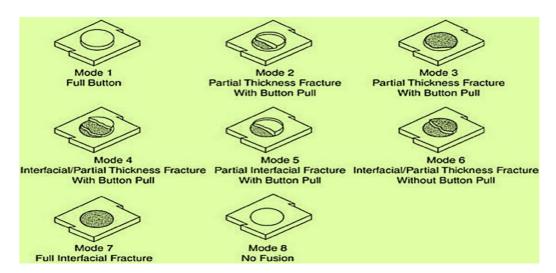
Fracture of pullout modes of weld buttons [17].
